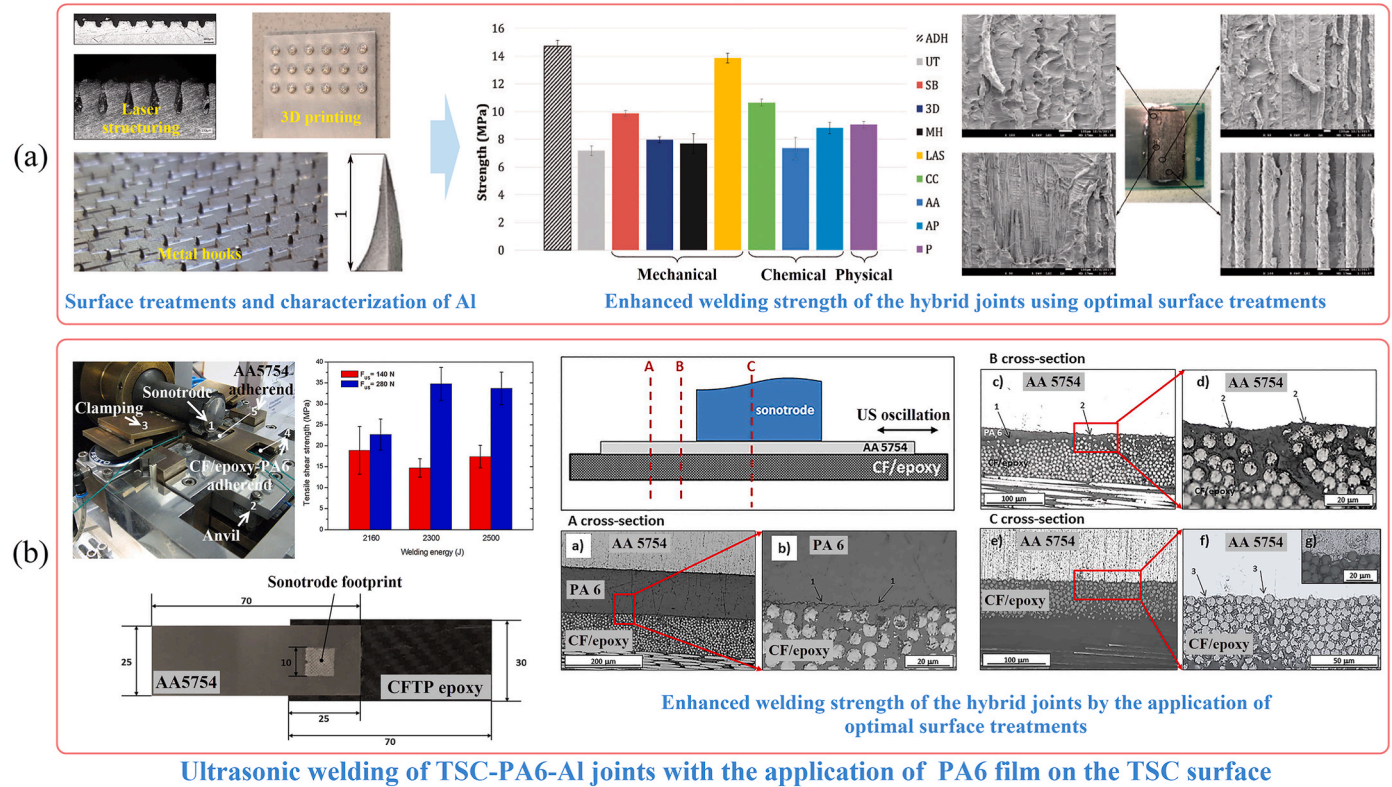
(a) Enhanced welding strength of CF/PA6-Al welded joints by optimal surface treatments of Al; (b) Enhanced welding strength of CF/epoxy-Al welded joints using PA6 film on TSC surfaces [112,116].
